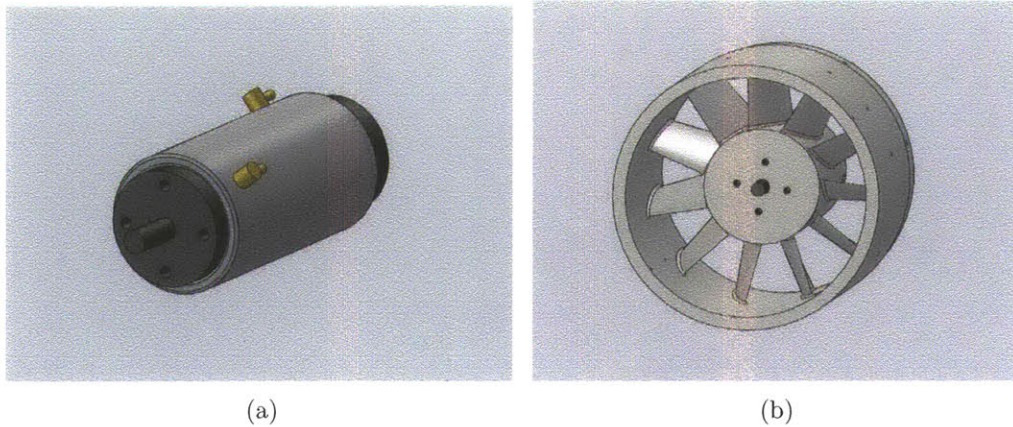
Electric motor installation: a) motor with installed water jacket; b) installed inside stator hub cavity.
